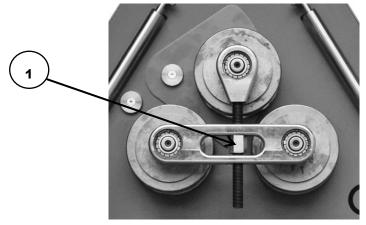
Properly mounted and tightened stabilizing set: 1 - tightening nut
